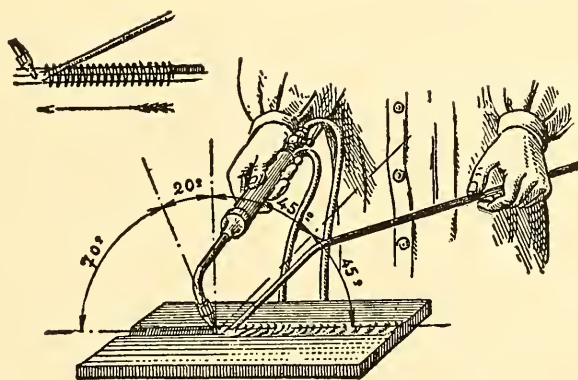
Position of Torch and Rod for Backward Welding.
